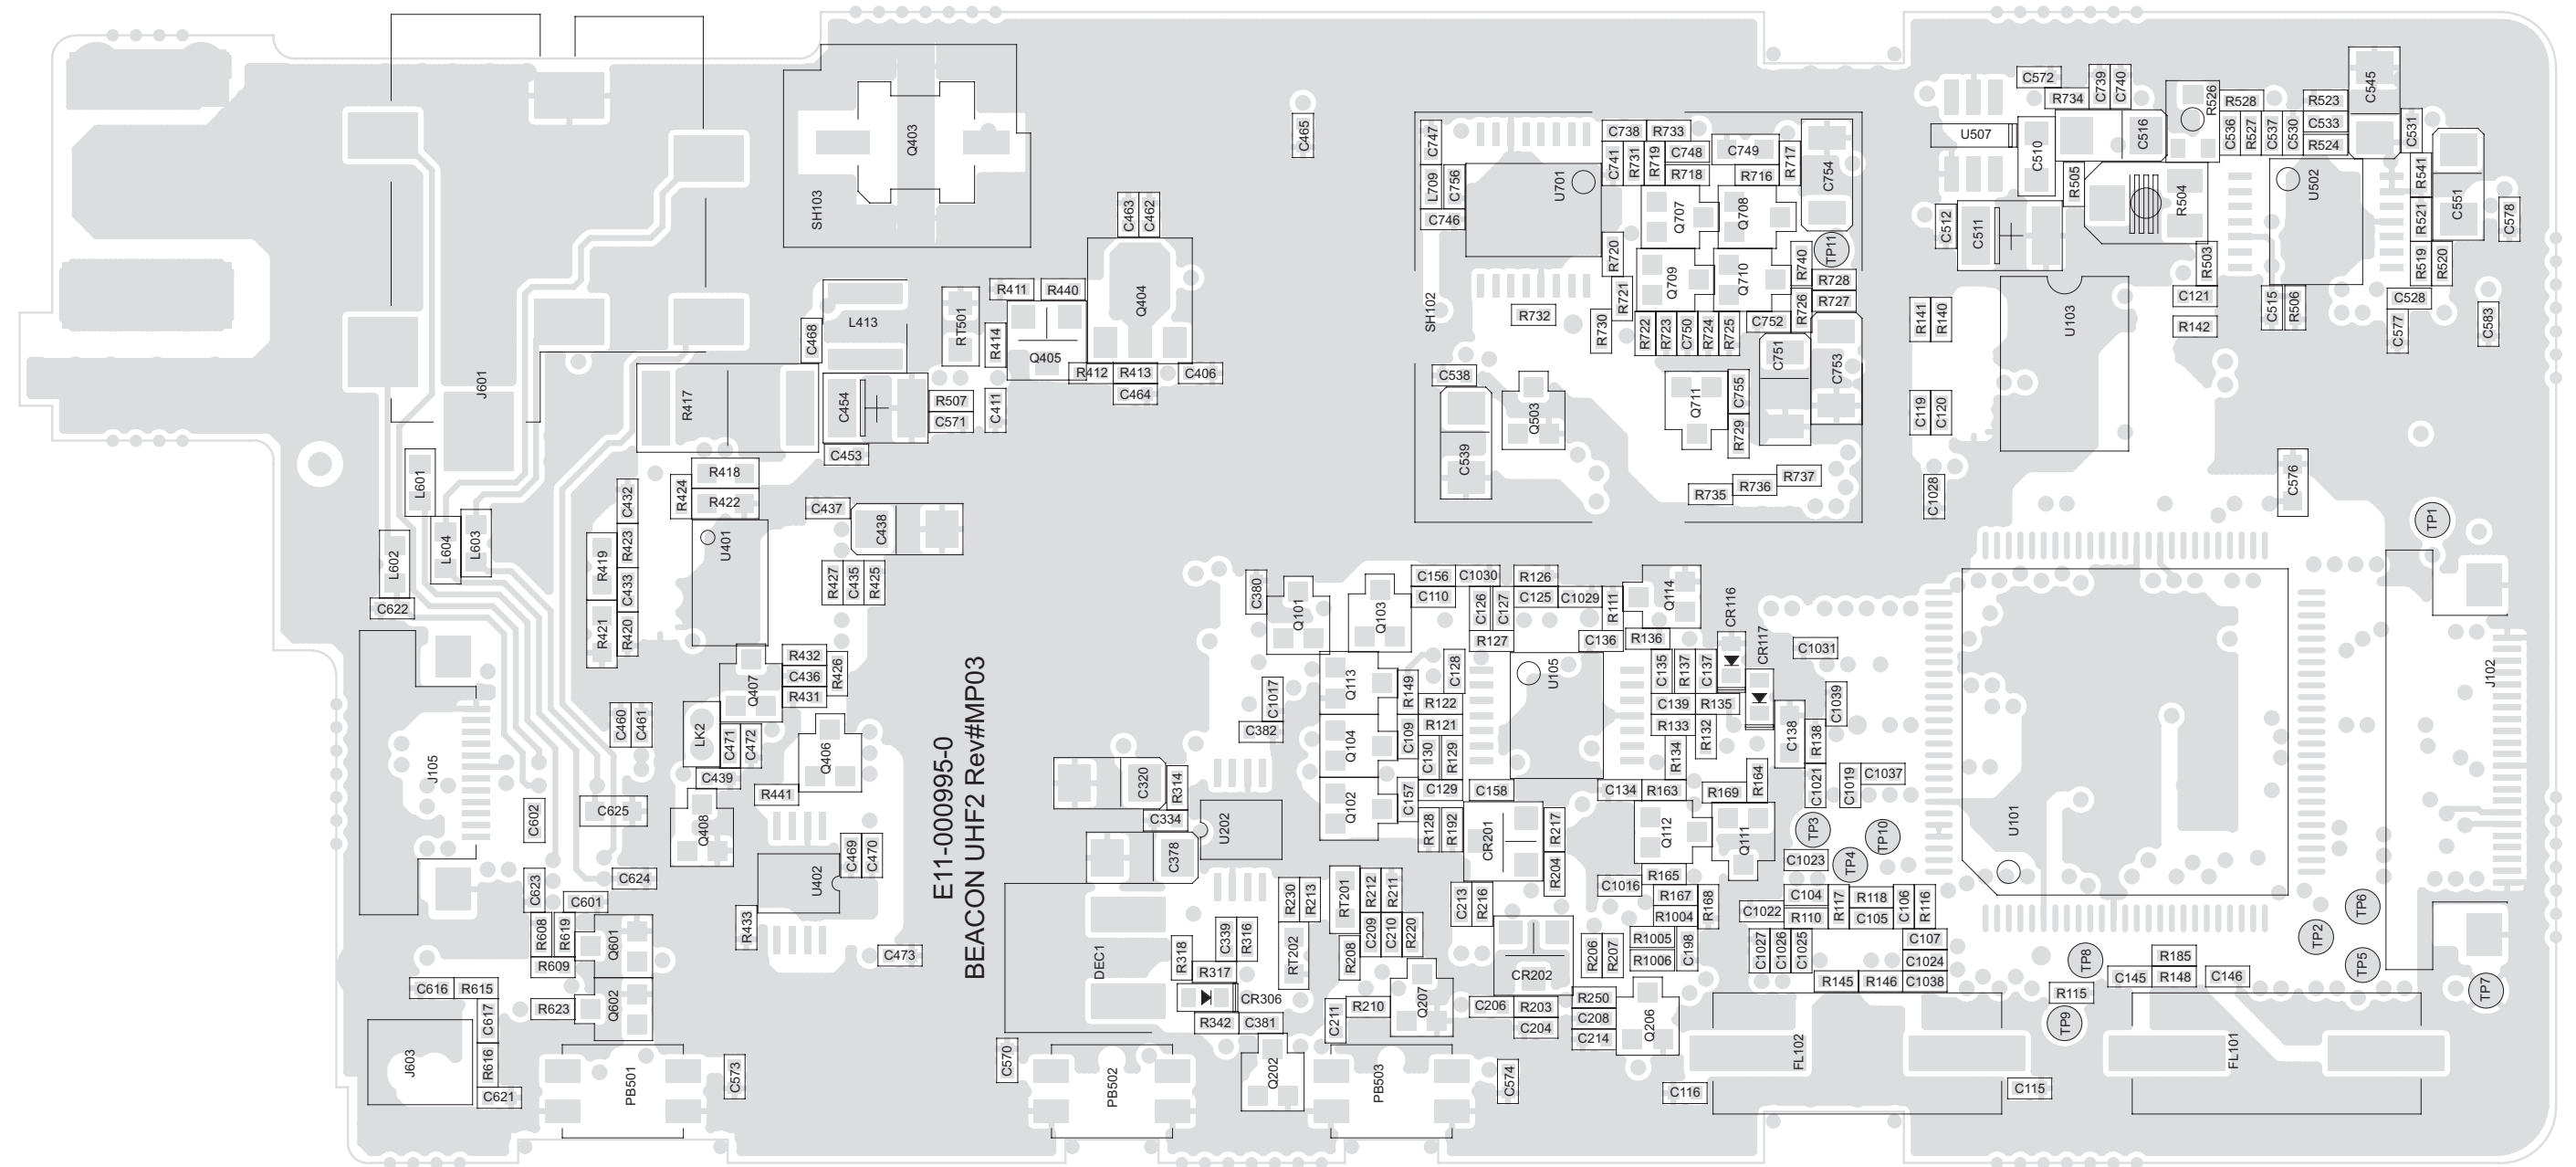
UHF2 (435–480 MHz) Mainboard Top Side: PCB No. E11-000995-00
